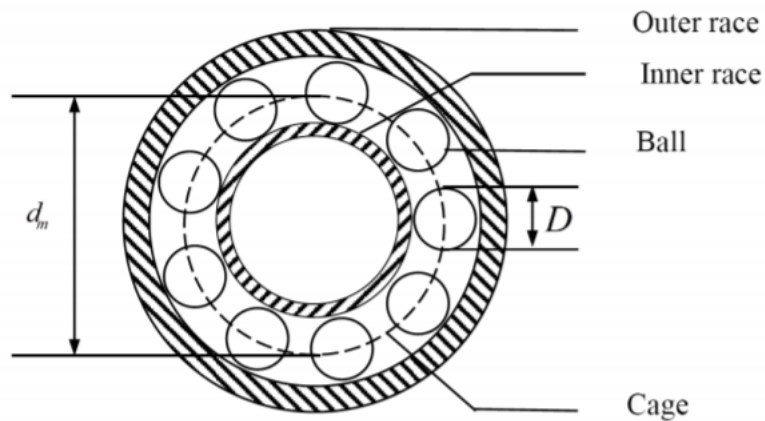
Rolling element bearing components (Liu et al., 2013)
